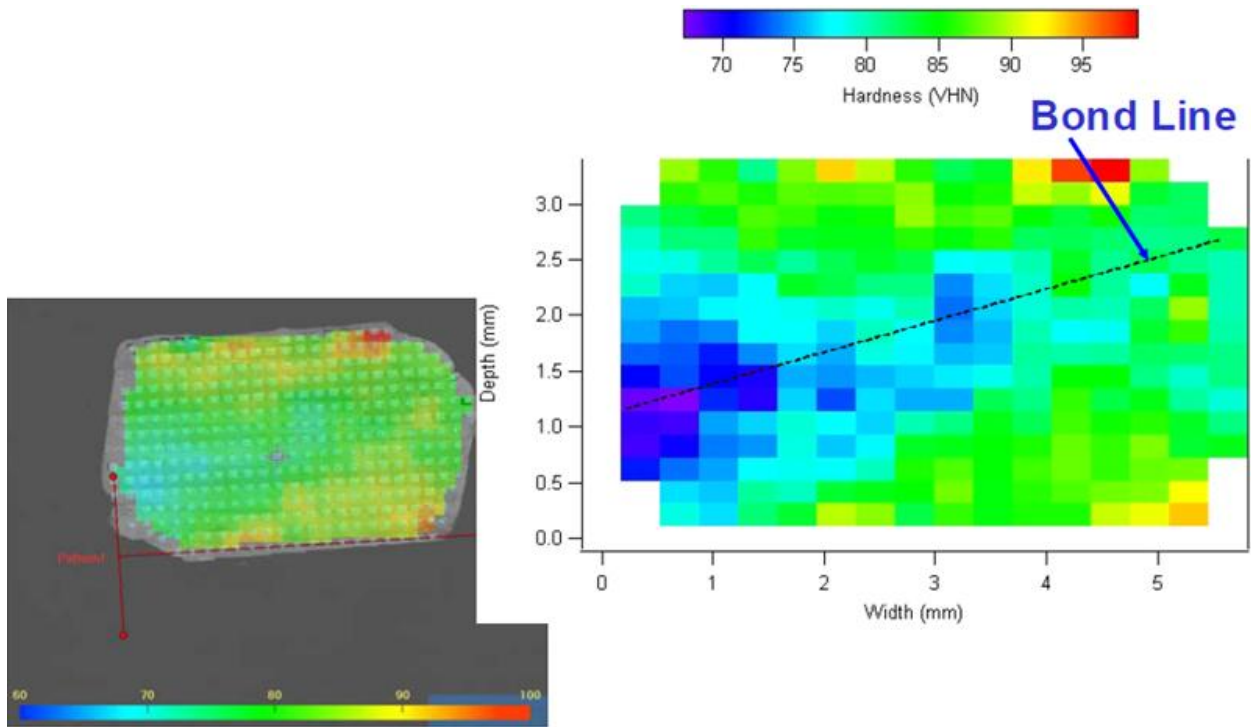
Microhardness of Cross-Wire Weld (Weld 62) for Weld Cross Section
